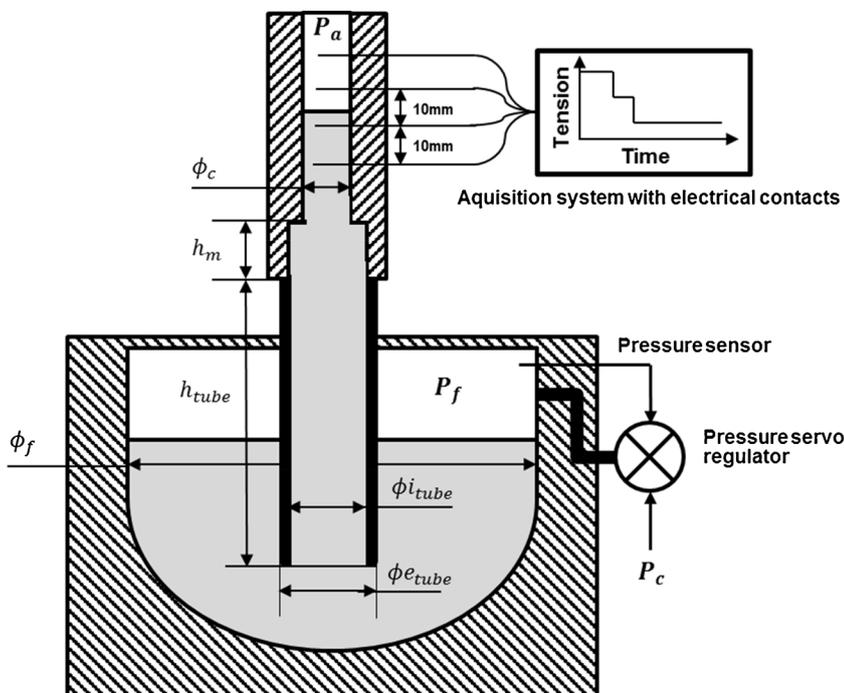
Vertical cross section view of the Low-pressure casting system and instrumented sand mold.
